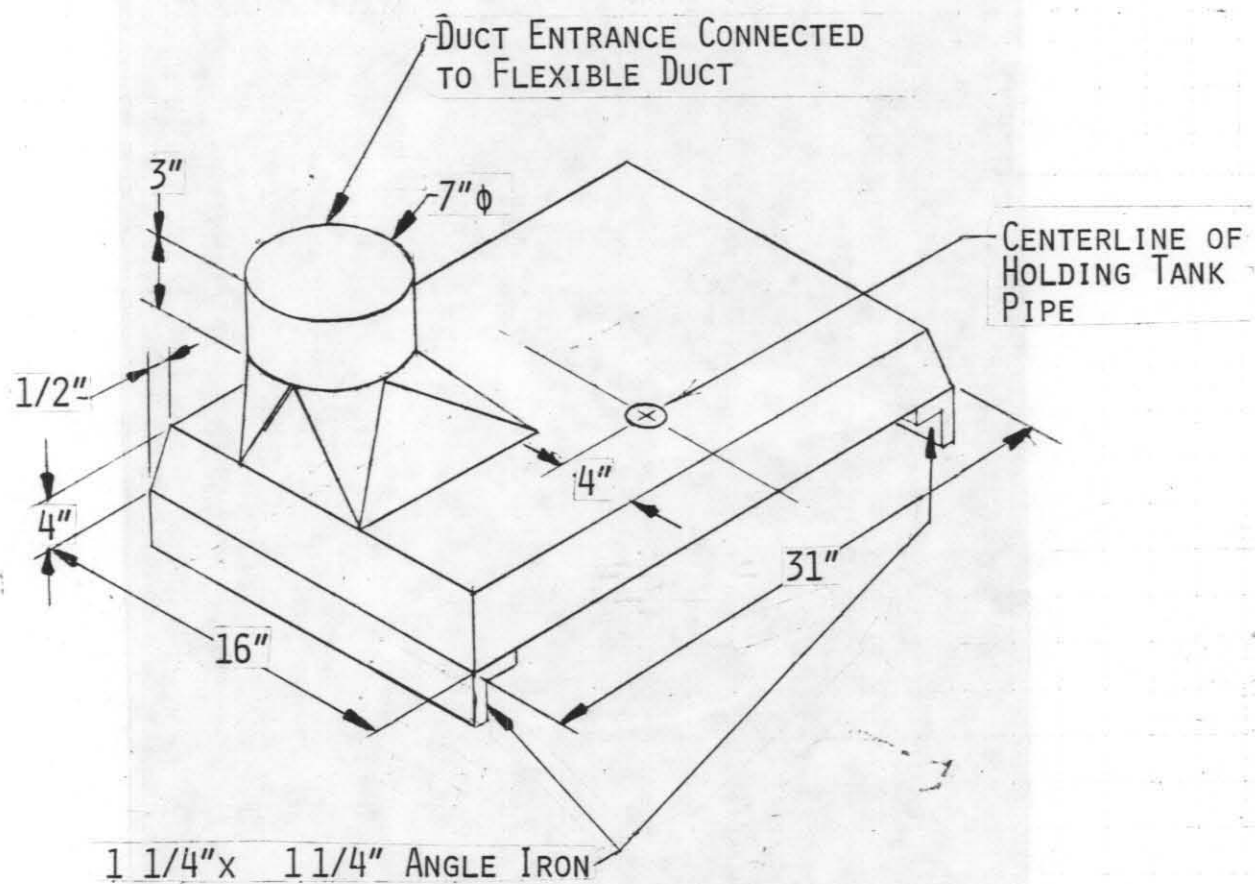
Cement house holding tank outlet hood (H-5 through H-10) detail.
